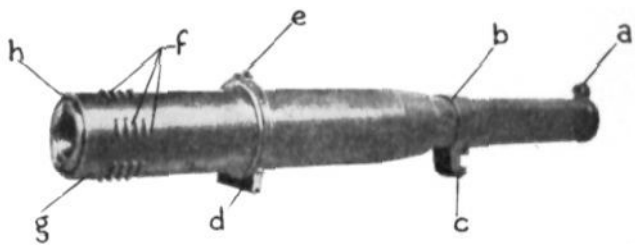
MOUNTAIN GUN, SCHNEIDER MODEL 1919 (TUBE)
